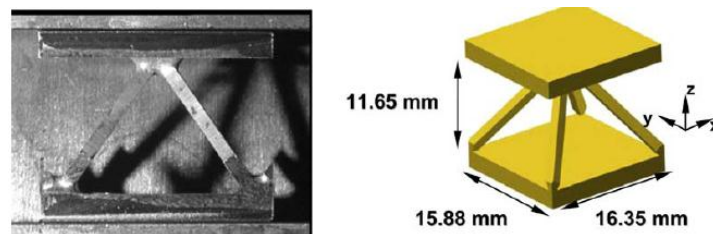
Unit stainless steel pyramidal truss core [61].
